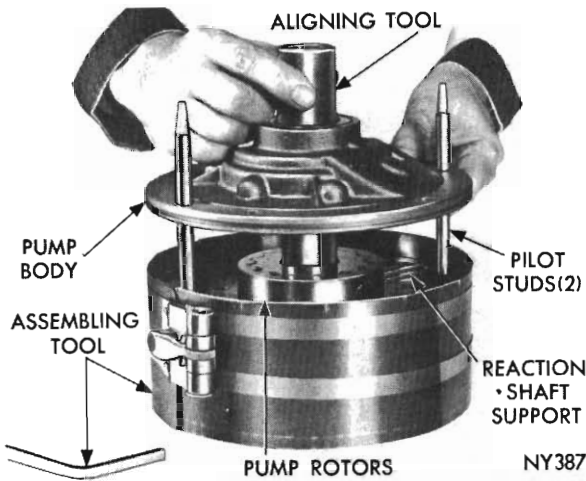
Assembling pump and reaction shaft support (A-904)
